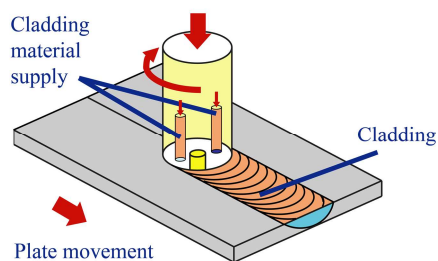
Schematic representation of friction stir welding with cladding.
